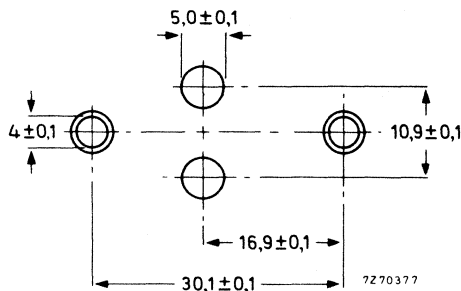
Hole pattern for 500 V insulation, nut fastening.
